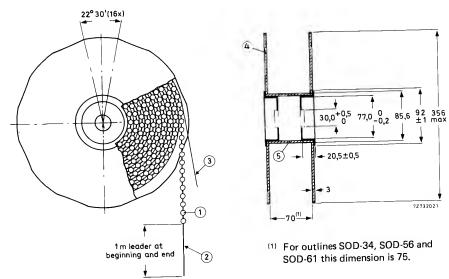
Reel dimensions (mm) for axial-leaded components.
